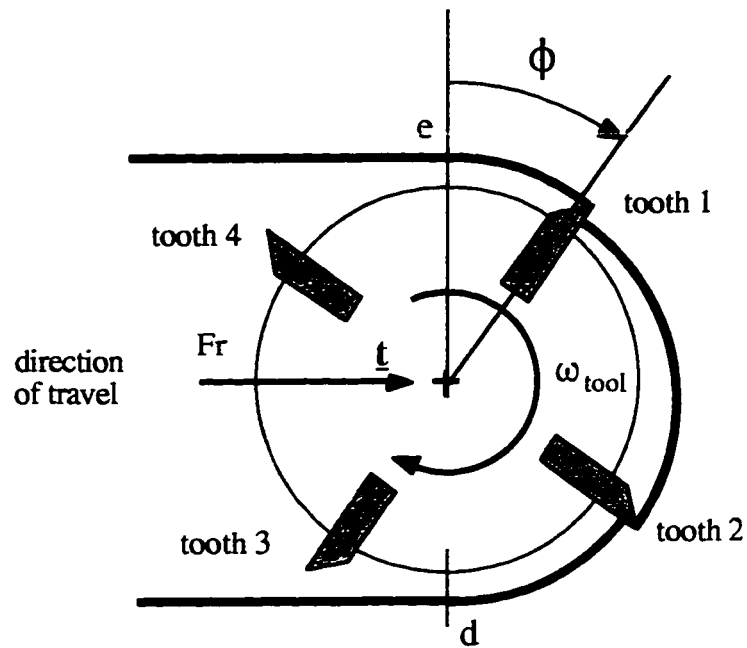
Top view of a four tooth cutter in a full groove cut
